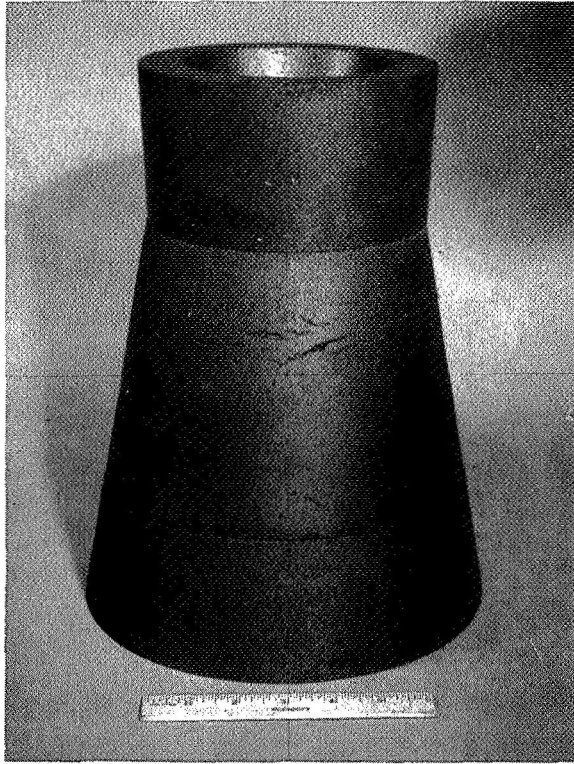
SECOND NOZZLE ASSEMBLY BEFORE FIRING
